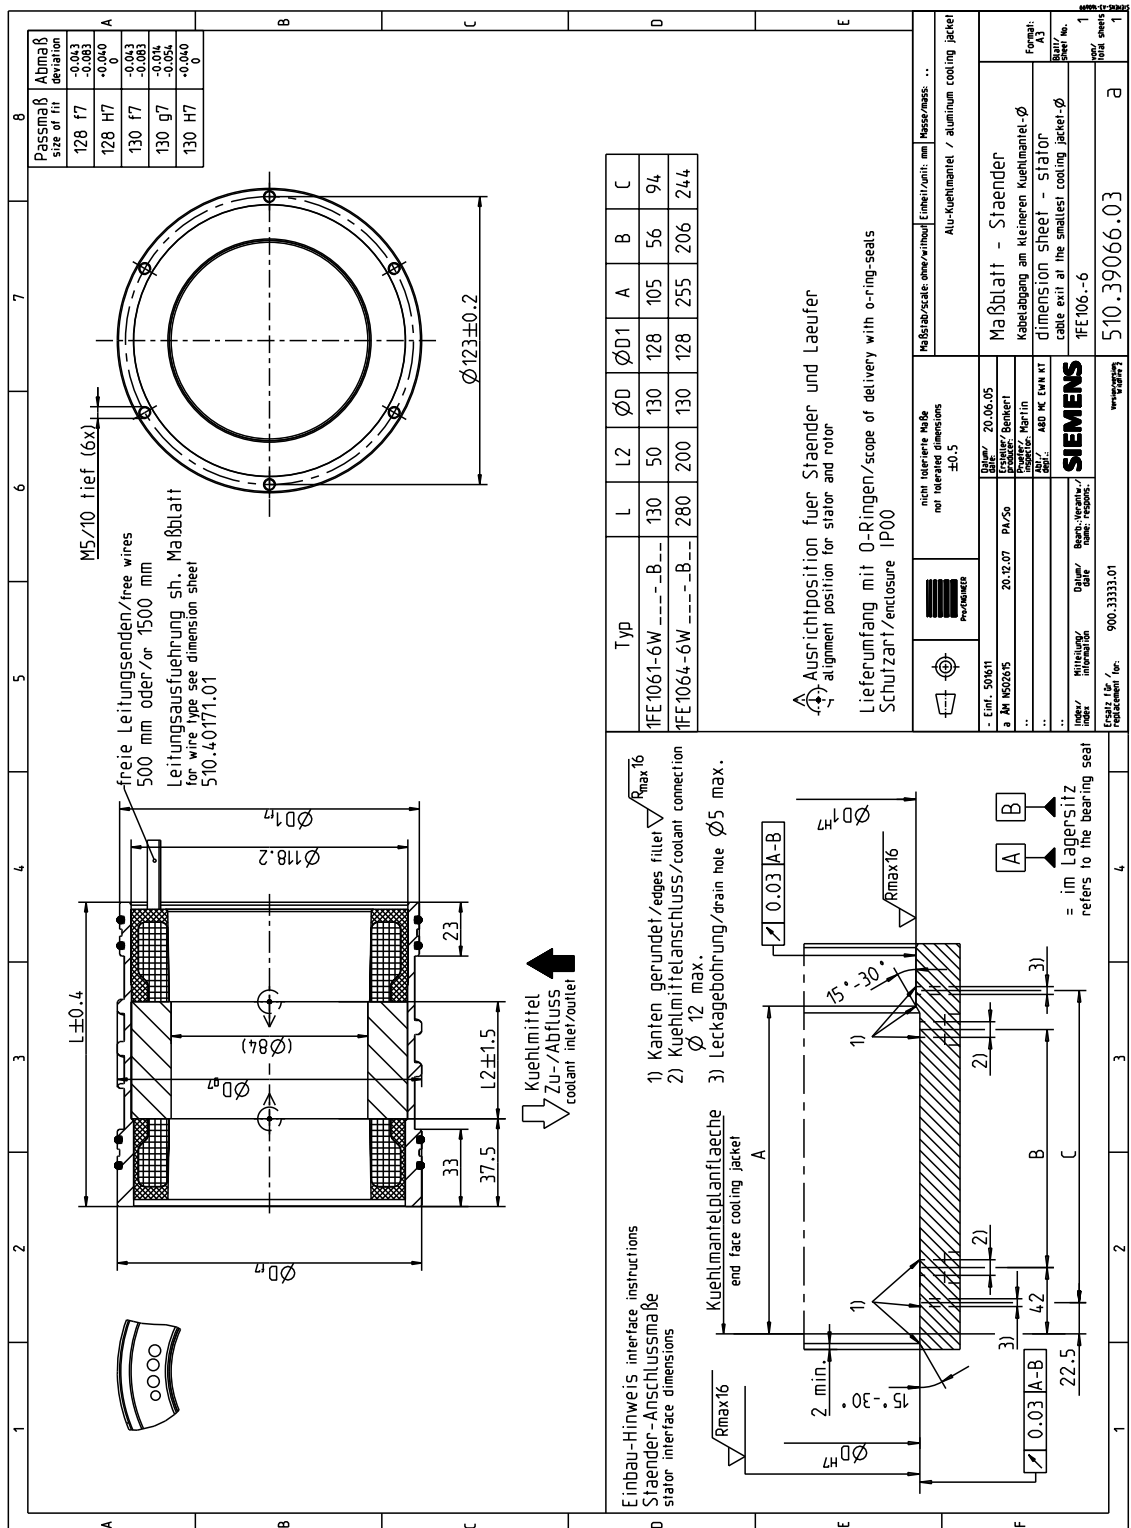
1FE106-6, stator with cooling jacket, cable outlet at the smaller cooling jacket diameter
